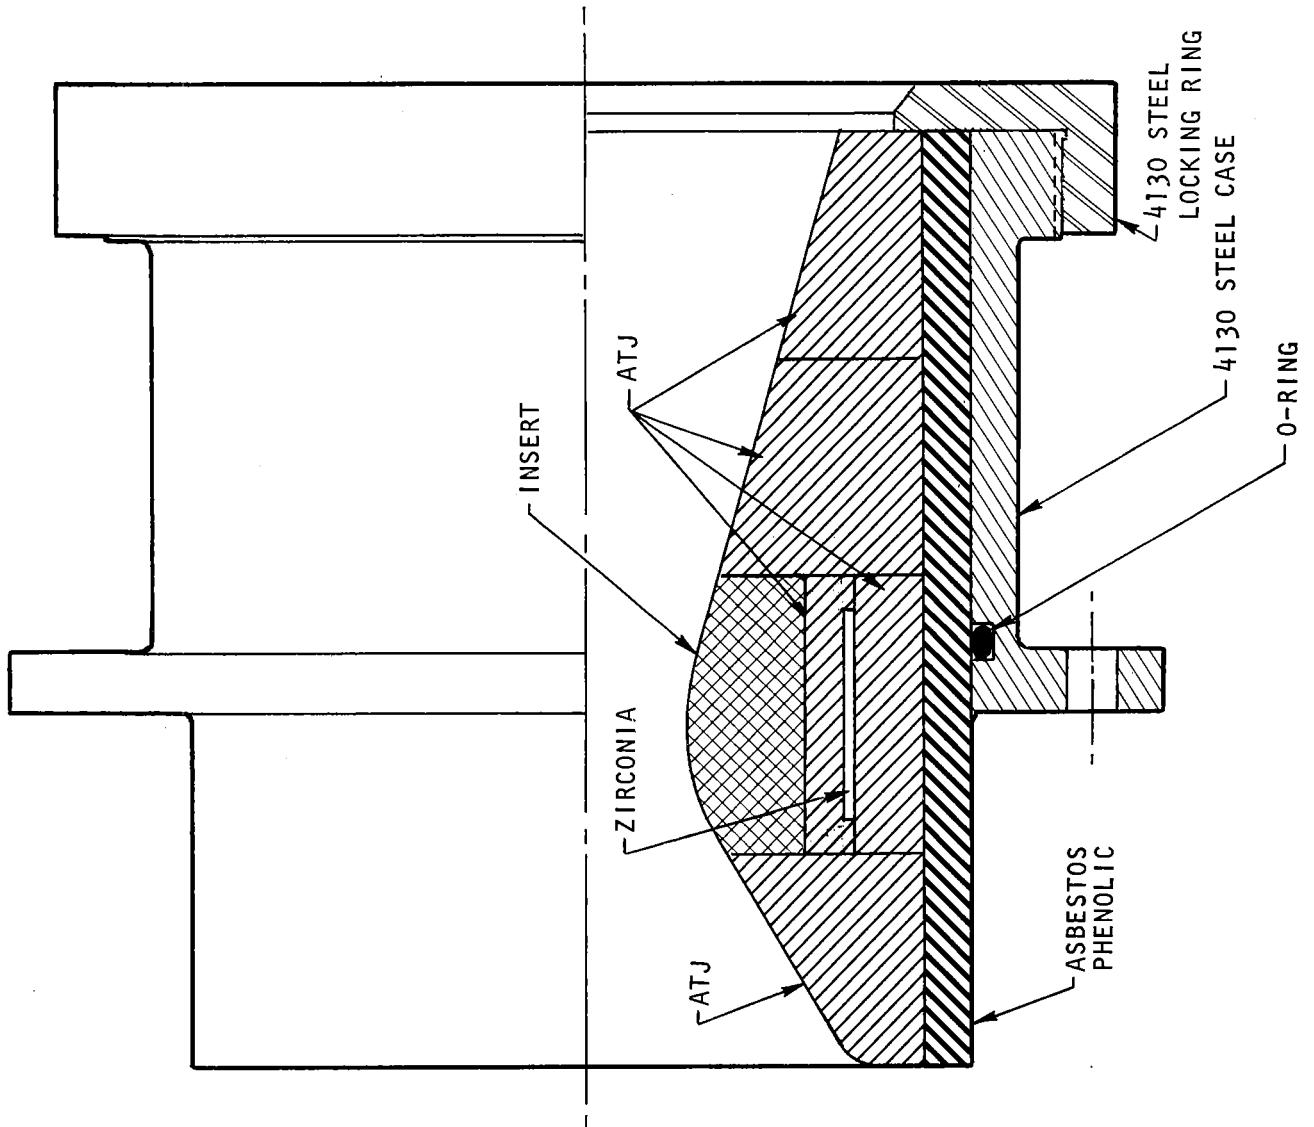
Nozzle Assembly for NASA-LRC Hybrid Motor
